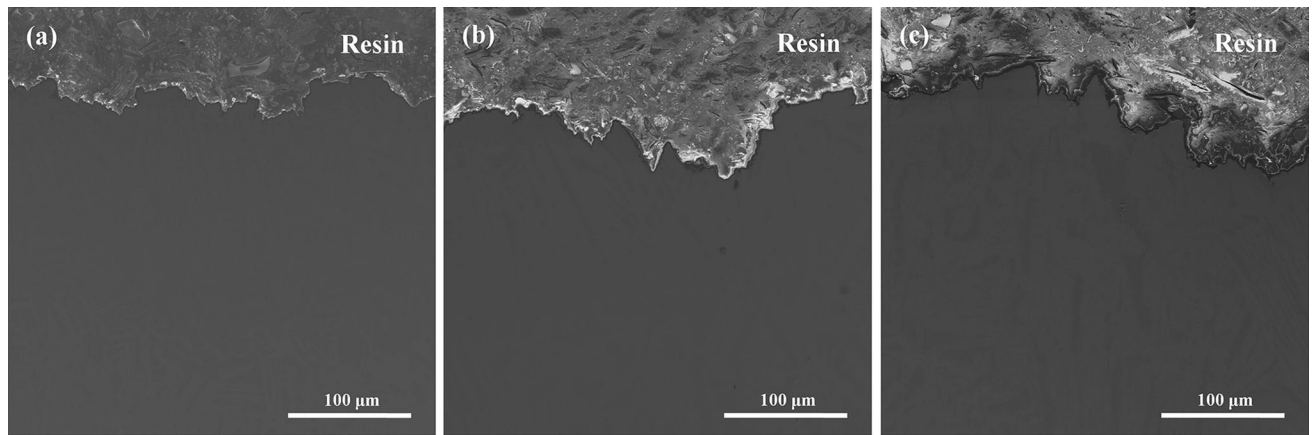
Longitudinal cross sections below the fracture surfaces of the tensile test specimens cut from the as-extruded rods: (a) Ti-1273, (b) Ti-1373, and (c) Ti-1473.
